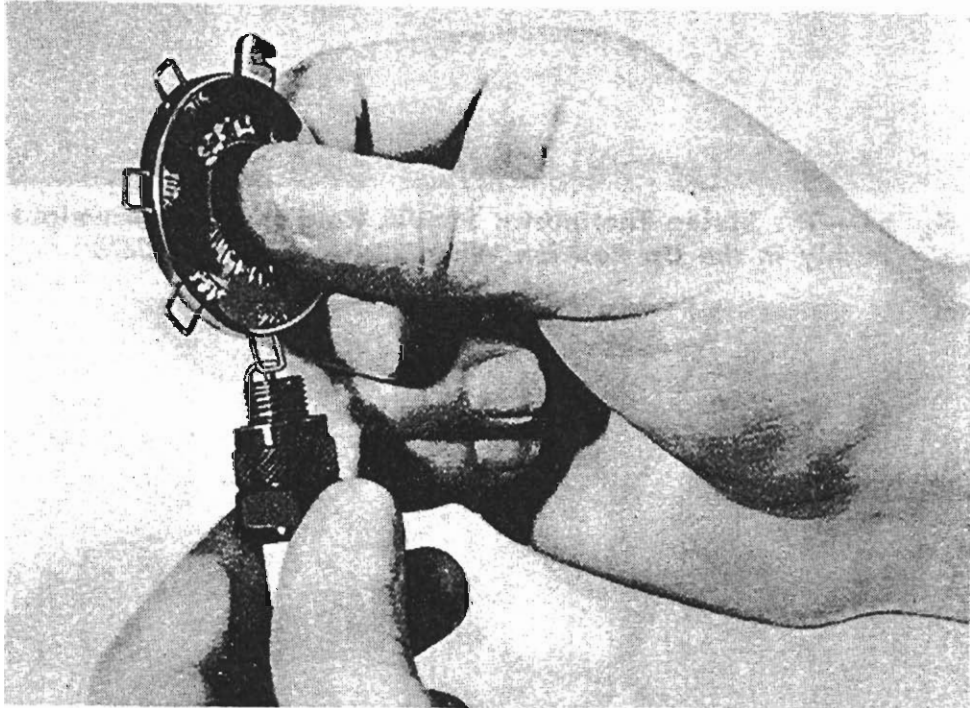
The Spark Plug Gap Should Be Checked with a Round Wire Gauge Tool.
